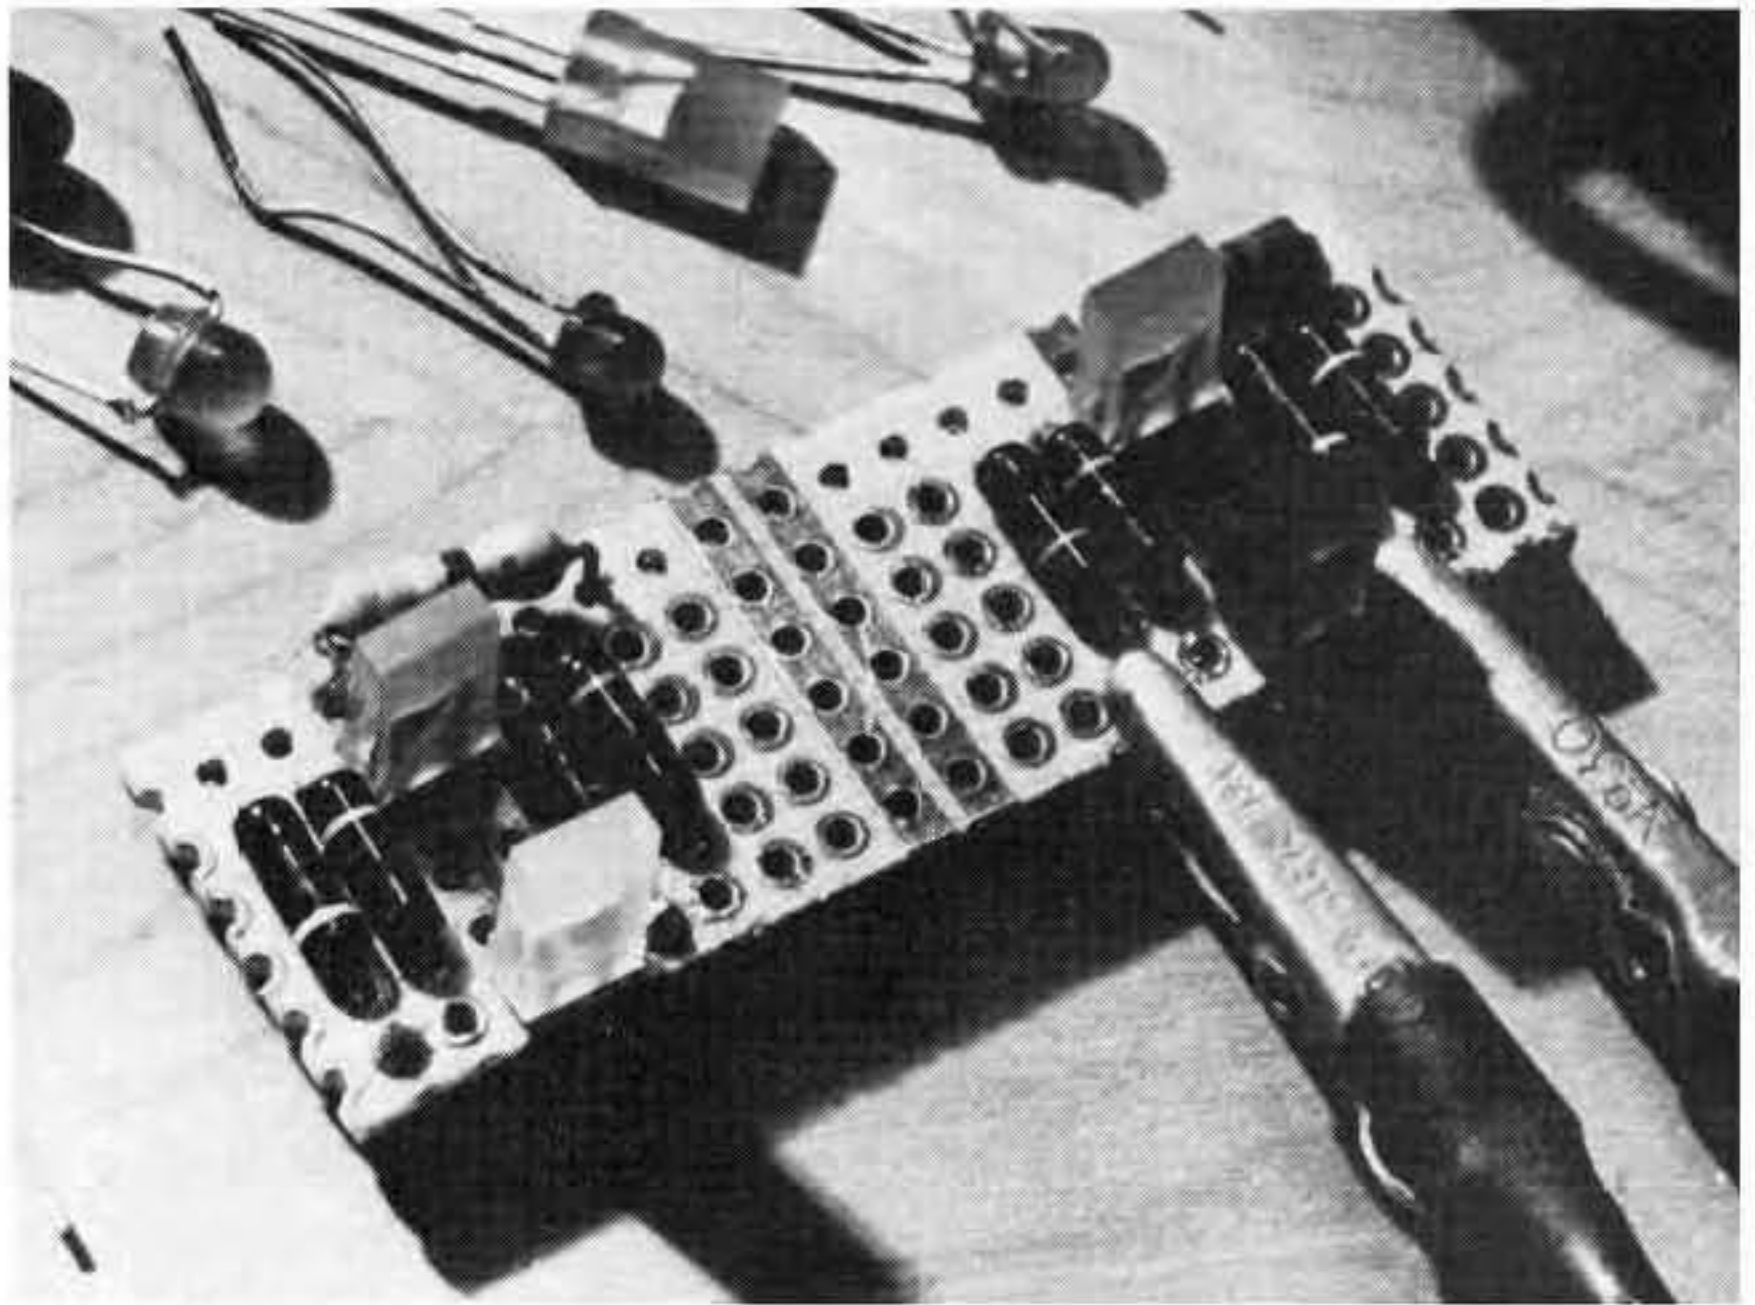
ONE SMALL PIECE of board holds two complete motor-direction indicators. Current-limiting resistor is visible at top-left of board, above LED.
